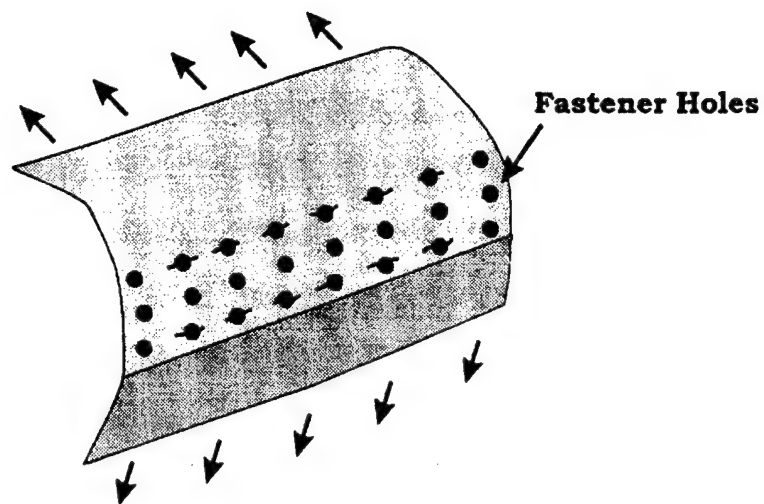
Multiple Site Damage problem in a lap-splice joint in which some of the cracks are moderately kinked.
